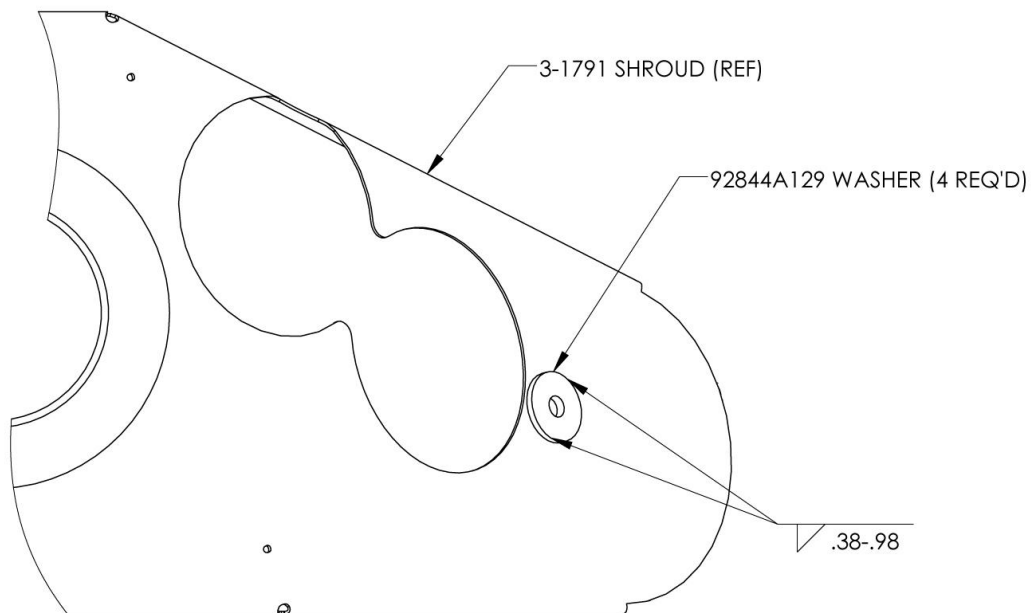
, Washer Welded to Shroud (4 Places)
